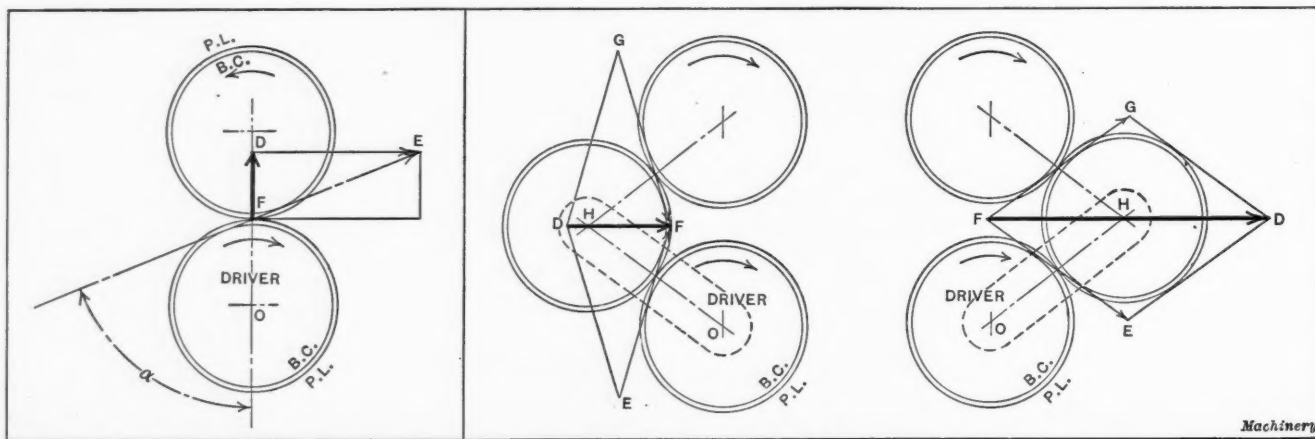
Forces due to Tooth Pressure in Gearing Figs. 2 and 3. Diagrams showing Effect of changing Position of Tumbler relative to Driving Gear
